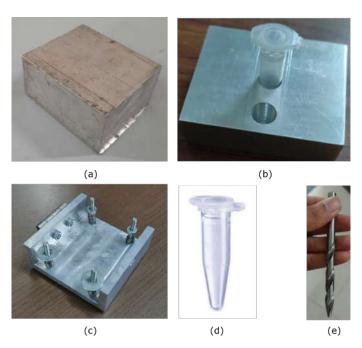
(a) Raw Aluminium block (b) Tube holder after manufacturing (c) bracket after manufacturing (d) Eppendorf tube (e) modified drill bit
